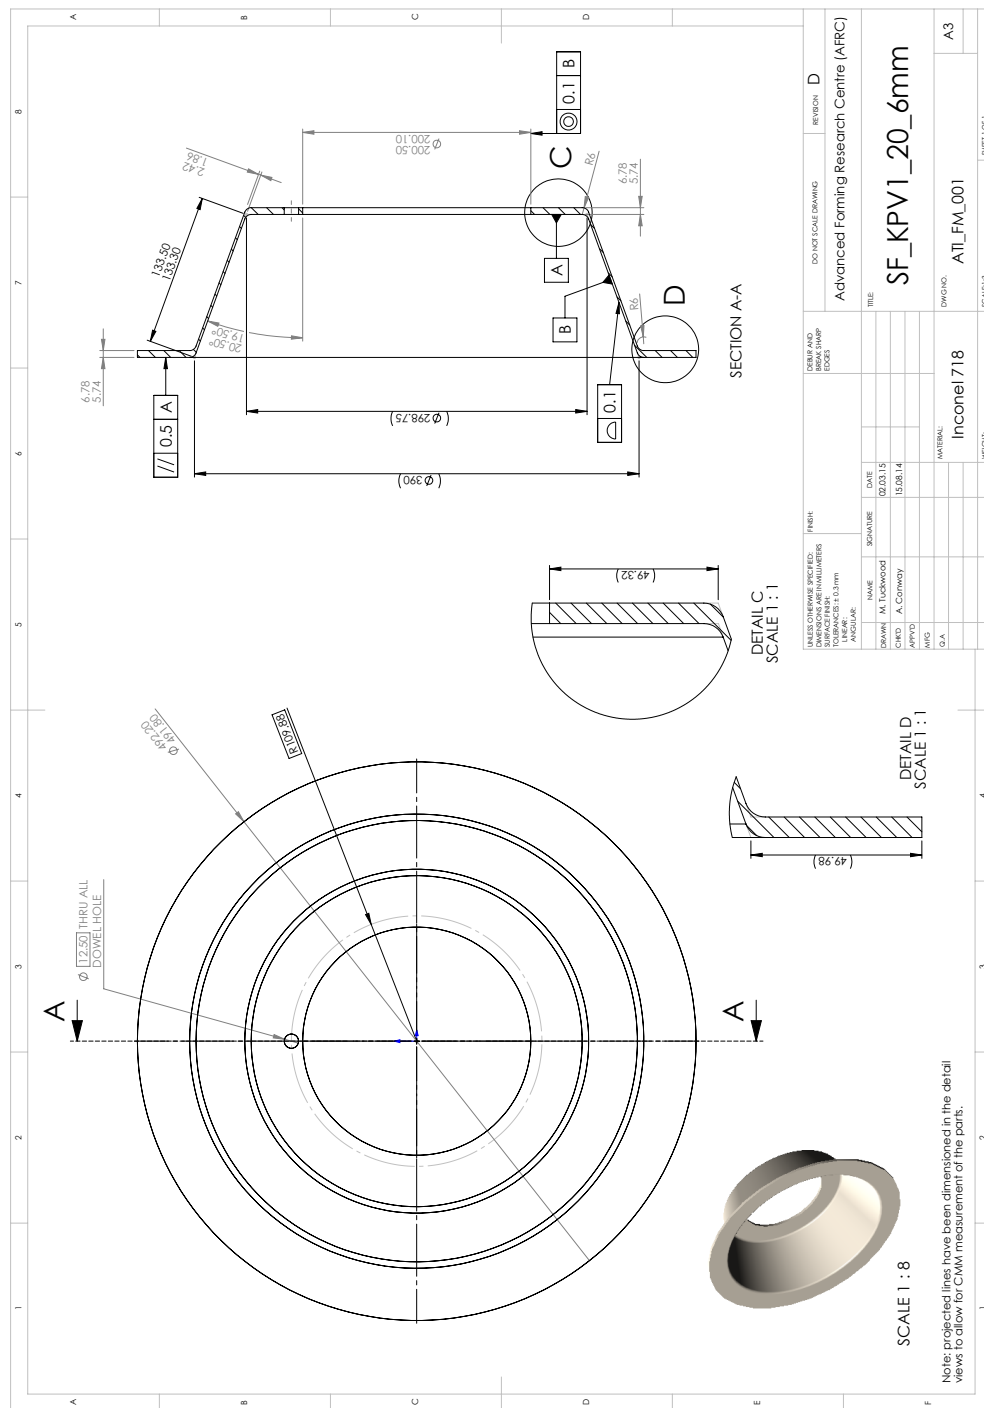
Drawing: Shear formed part – 20°, 6 mm thick, ATI-SF – ATL FM 001, “SF\_KPV1\_20\_6mm”.
